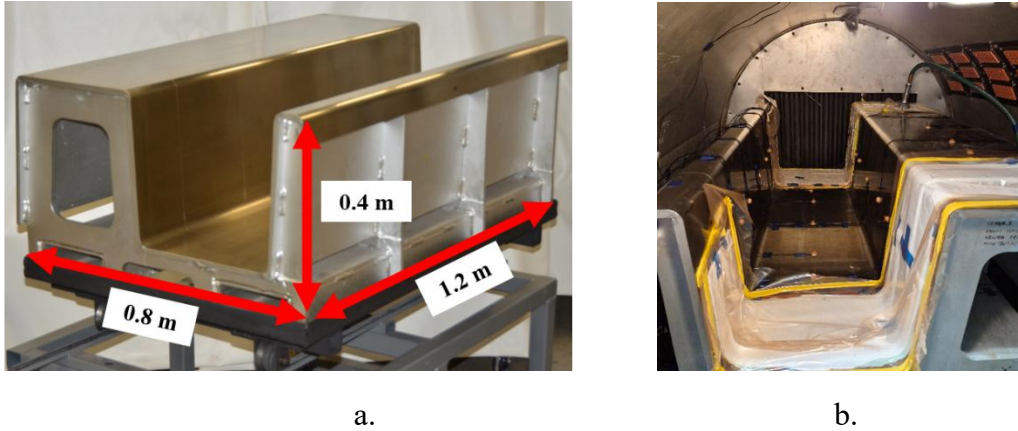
(a) Image of the 400 kg CCMRD Invar tool with dimensions; (b) the part-tool assembly prepared with HEXCEL-8552 prepreg and vacuum bagged inside the CRN autoclave.
